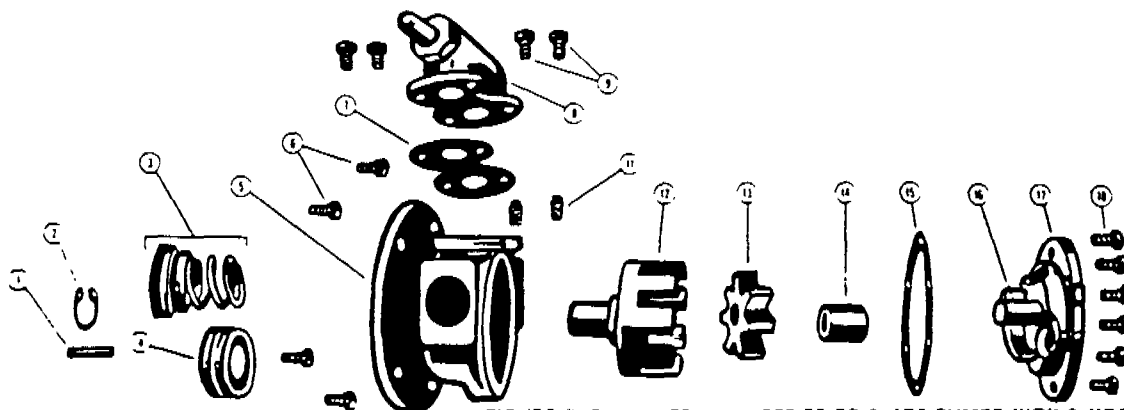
EXPLODED VIEW SERIES 75 & 475 PUMPS ("G" & "GG" SIZE)
